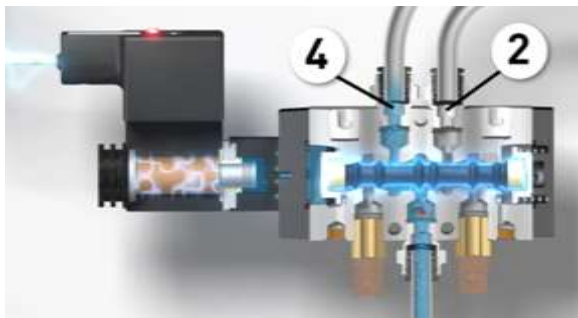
Illustration of compressed air flowing through a solenoid valve
